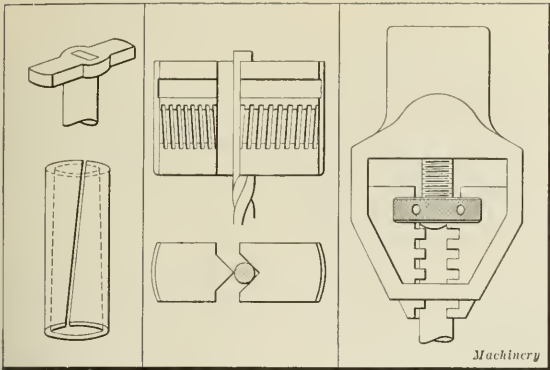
Driver Plate and Taper Sleeve      Fig. 10. Reid Chuck Jaws with Three Contact Points      Fig. 11. Open Type of Chuck with Positive Drive
